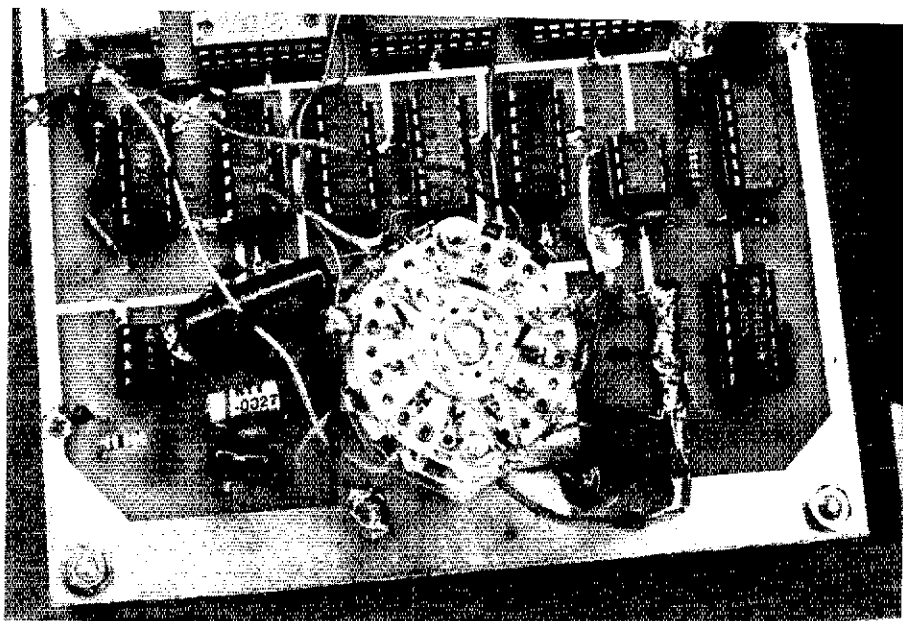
Component side of the double-sided board near S1. The board shown is a prototype and differs slightly from the final version.
